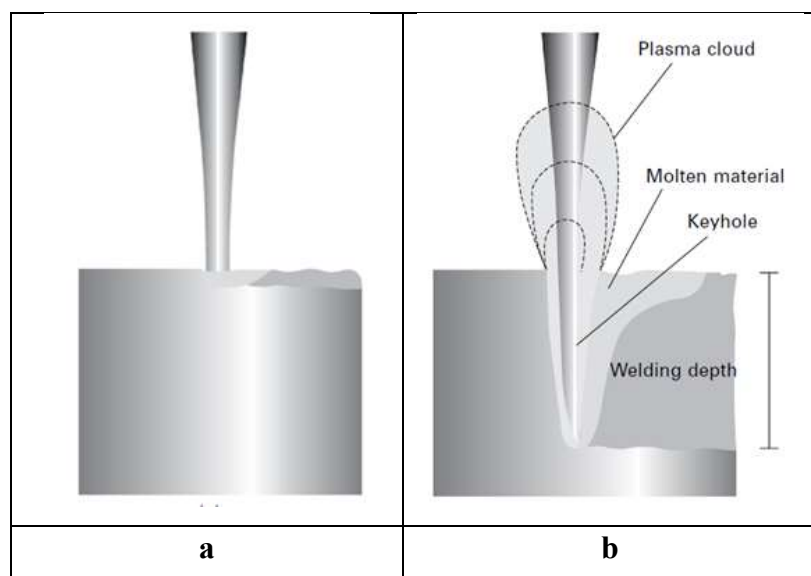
is a schematic representation of (a) conduction mode welding and (b) keyhole mode (deep penetration) welding [14].
